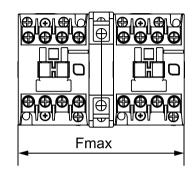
TGC1s-40~95 outline and installation dimensions drawings
